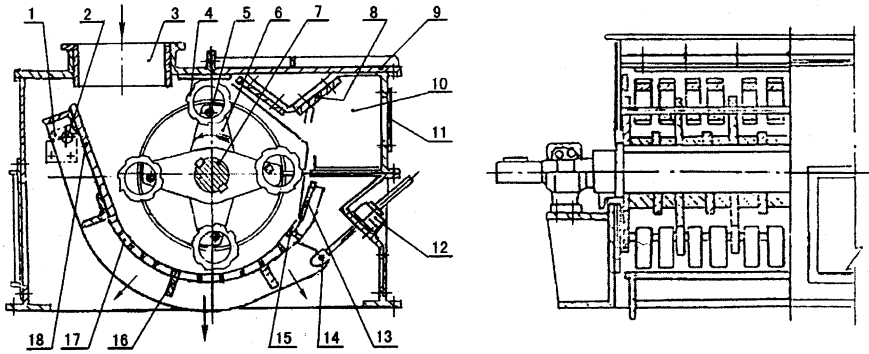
HSZ-800 type ring hammer coal crusher 1. limiting plate; 2. hanging scroll; 3. feed port; 4. hammer ring; 5. ring shaft; 6. rotating arm; 7. main spindle; 8. baffle-board; 9. machine cover; 10. deironing room; 11. sealed door; 12. sieve frame adjusting device; 13. dial plate; 14. hinge pin; 15. small sieve plate; 16. sieve plate frame; 17. arc-shaped sieve plate; 18. crushing plate
